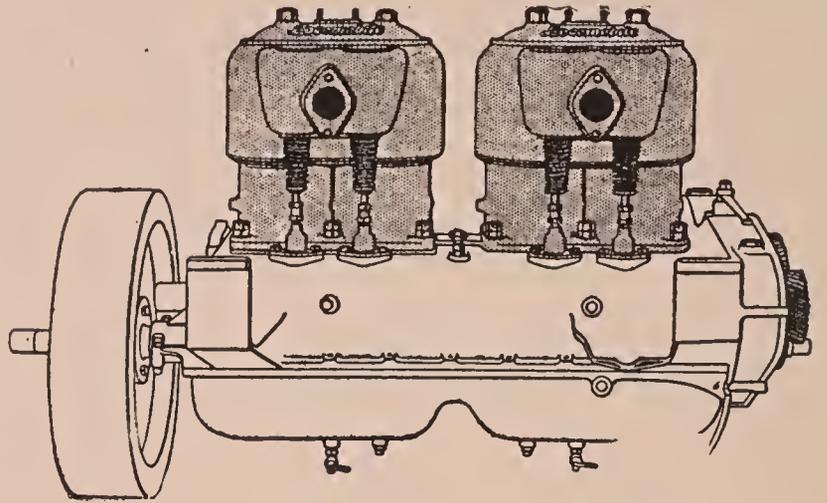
Another view of the inlet side after the removal of carburetor and inlet pipe, also pet cocks.
